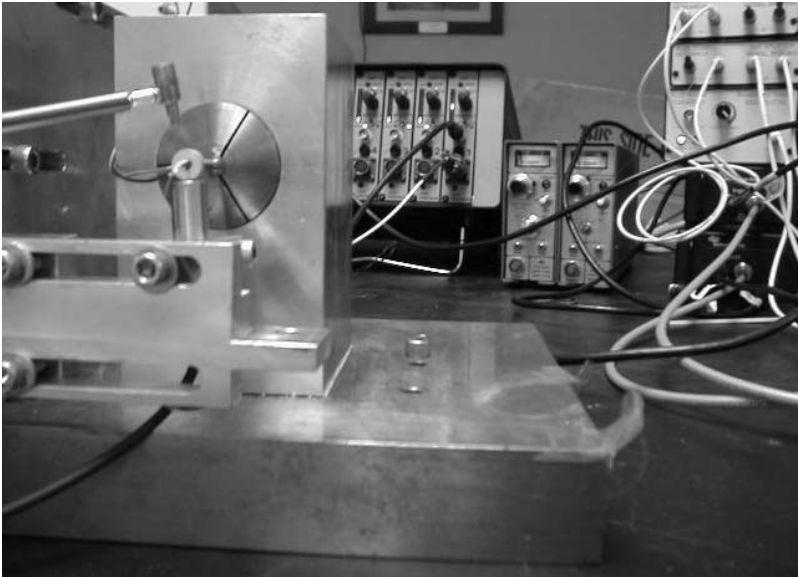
The carbide tool with the aluminum collar heat-shrunk onto the tool tip about to be struck with a calibrated impact hammer, the mounting bracket in the foreground held the capacitance probe; the fiber optic cable and strain relief Teflon tubing are barely visible at the tool tip.
